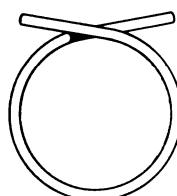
Indium gasket, closed by cold welding the overlapping ends
